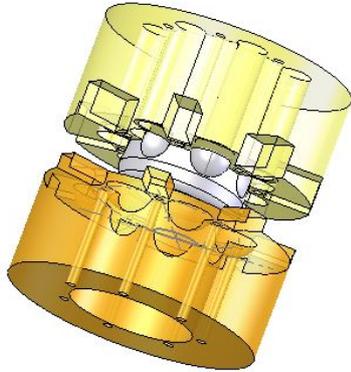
The finished-form stage Punch, Holder and Die CAD model.
